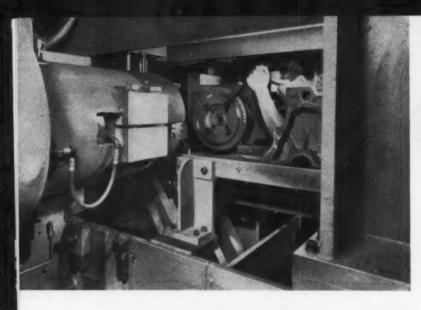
Milling-spindle quills are mounted in split housings. Cutters can be replaced without moving quills, or quills can be adjusted without doing anything to cutters.
